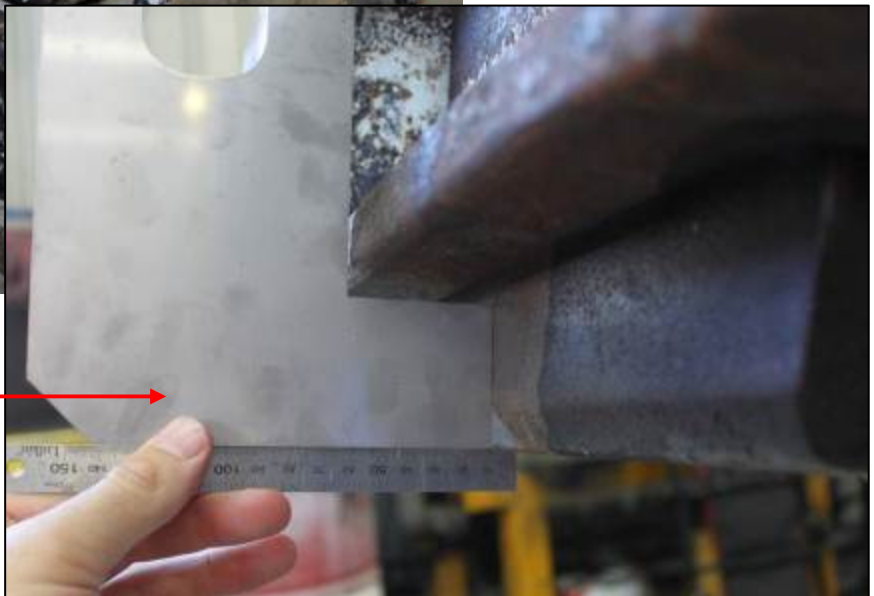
Checking QICS Tongue Extension using Gauge Part No. 5-12170702
